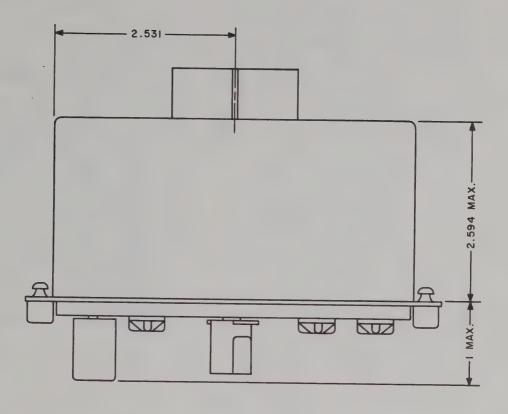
Outline and Mounting Dimensions, Power Supply 416W-1
